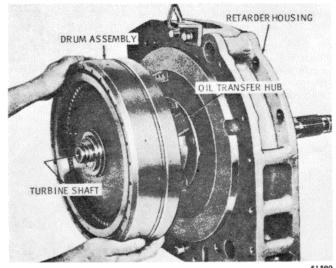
Removing Splitter-Direct Clutch and Drum Assembly
